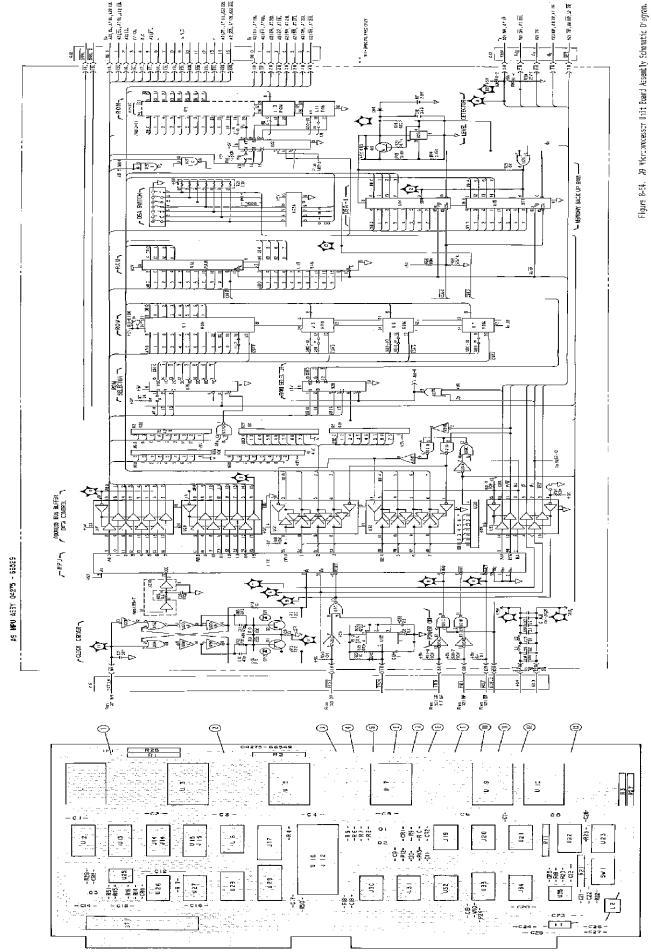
A9 Microprocesson Unit Board Assembly Component Locations.
